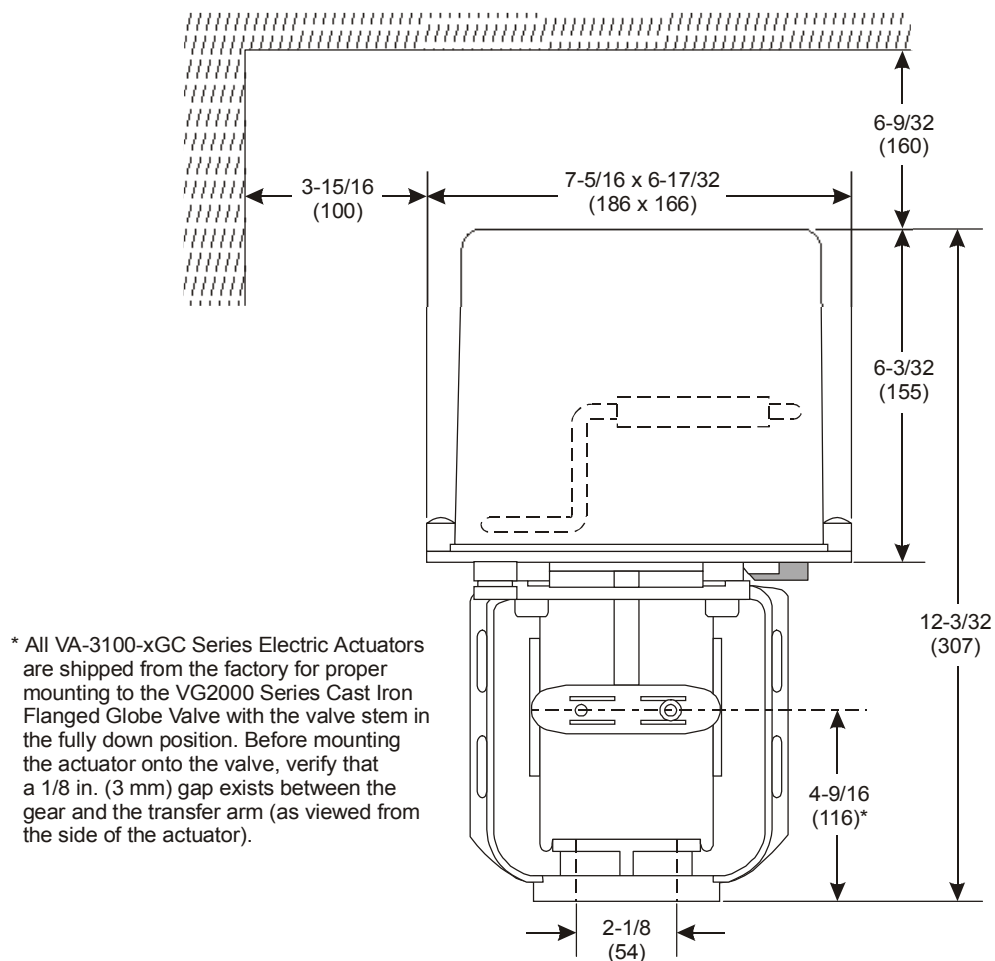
VA-3100 Series Electric Valve Actuator Dimensions, in. (mm)
